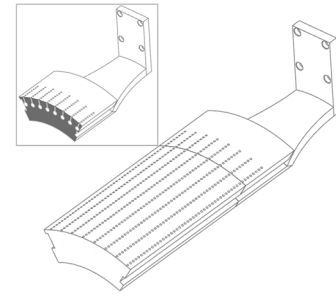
CAD-model of the gripper with sectional view focusing on internal structure
